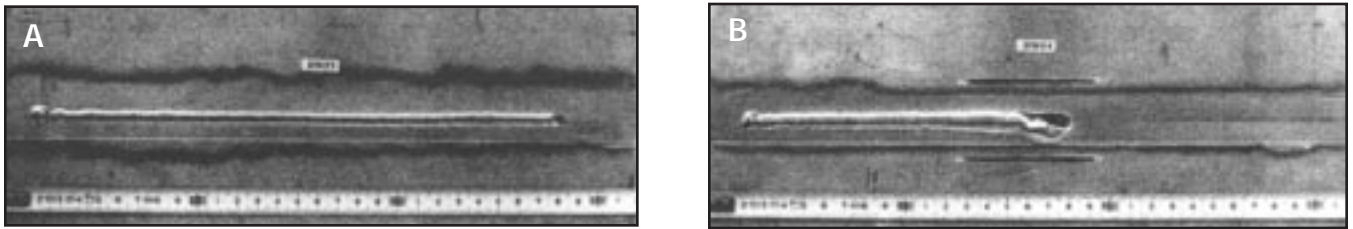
Back side photographs of weld beads in butt joints with wire feed. A — Ordinary workpiece; B — varied heat sink workpiece.
